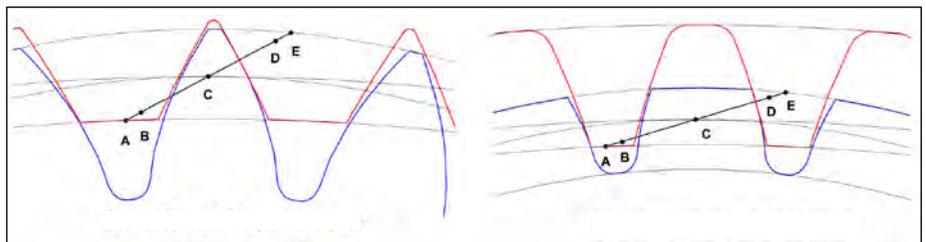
Internal meshing of low-loss gears (Ref. 6).
